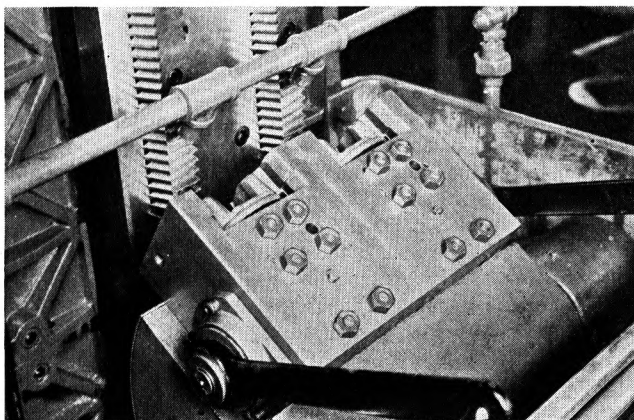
AUTOMATIC TILTING FIXTURE USED ON THE MACHINE SHOWN IN FIG. 6
